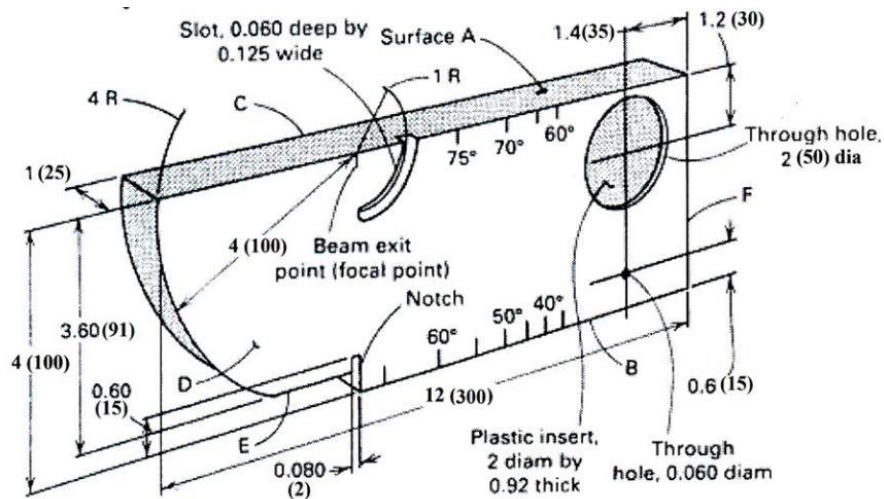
The V1 calibration block in the International Institute of welding [14]
